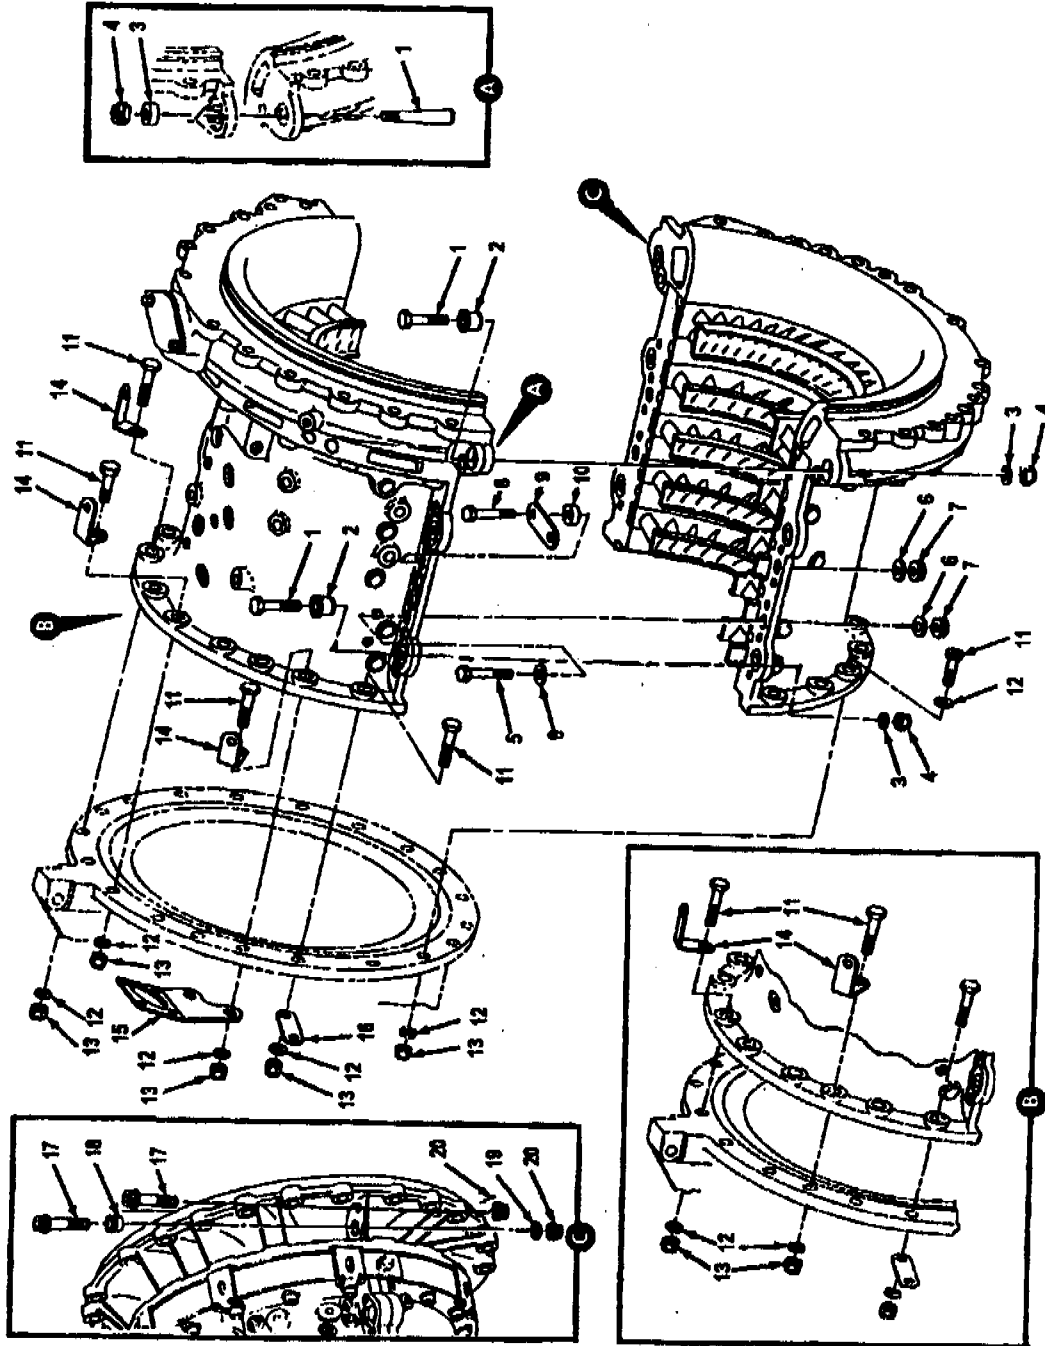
Compressor and Impeller Housing Assemblies and Attaching Parts.
